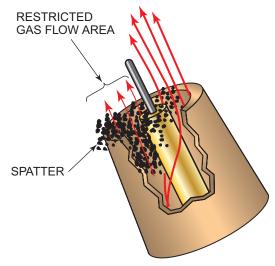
Shielding gas flow affected by excessive weld spatter in nozzle.
